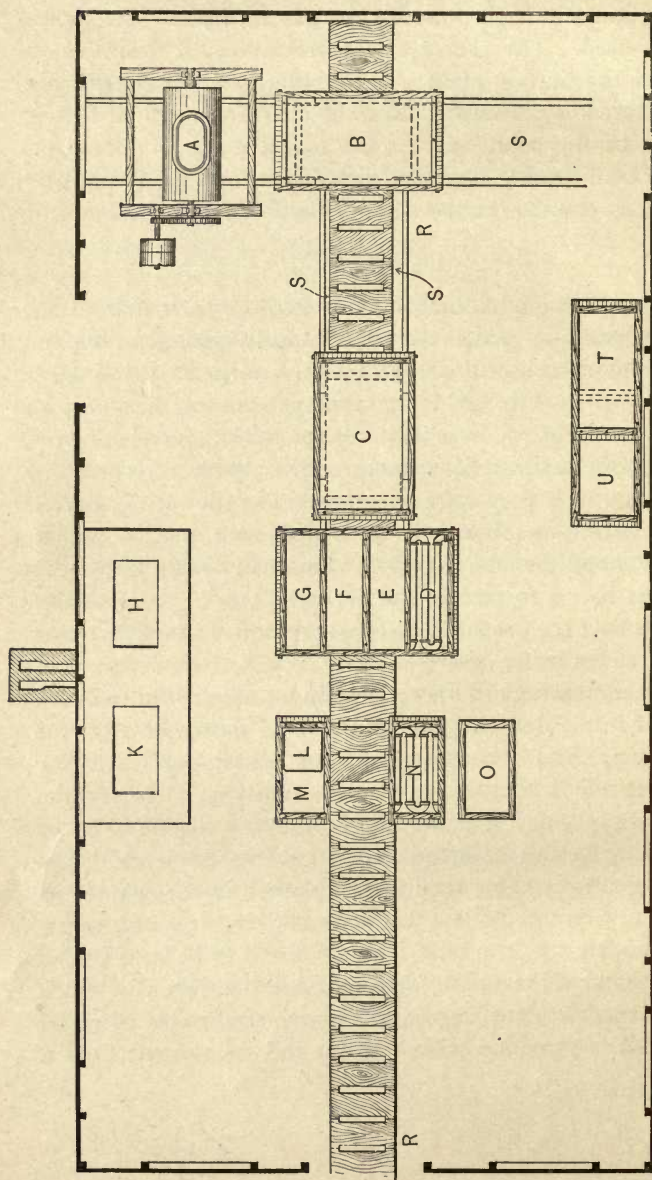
Ground Plan of Plant for Tinning Cast Iron.
